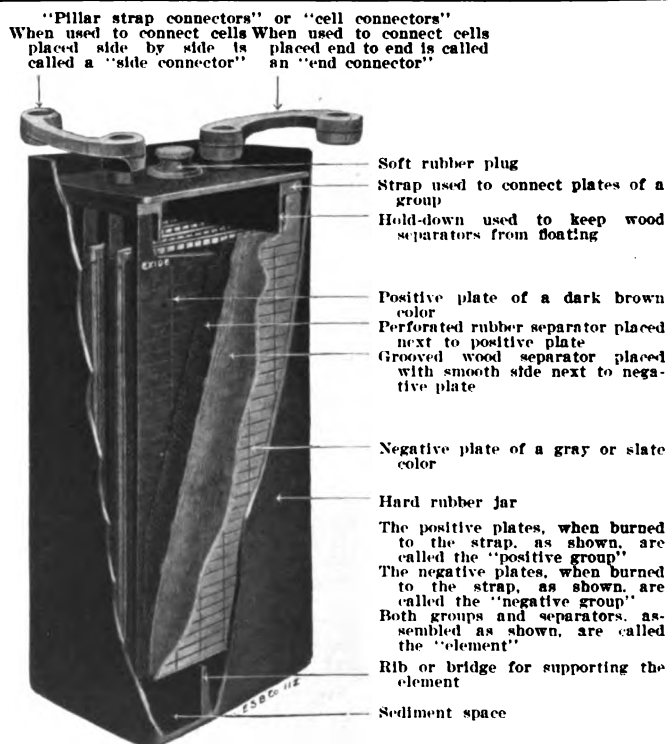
"Exide" Cell, Showing Parts Used and Method of Assembly.
